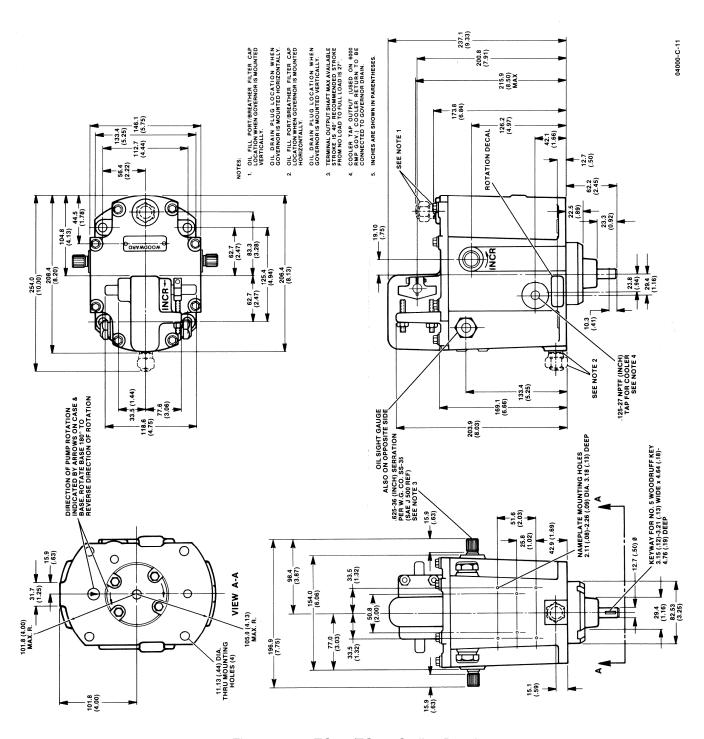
TG-13/TG-17 Outline Drawing Lever Speed Setting. Die-Cast Aluminum Case. Do Not Use For Construction
